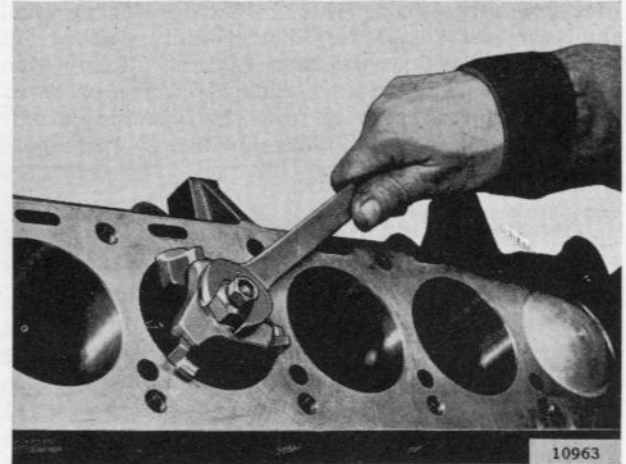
REMOVING RIDGE FROM CYLINDER BORE
